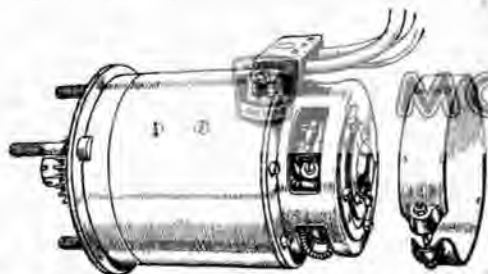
To inspect the commutator and brush gear of the dynamotor, first remove the dust cover.
